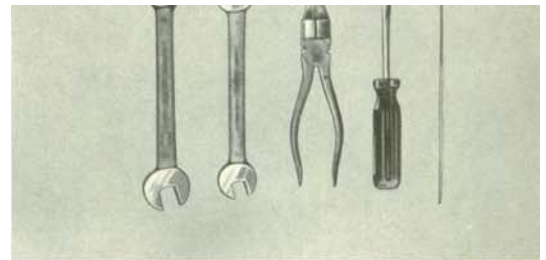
6. Locate adjusting nut in center position between the two brake rod halves and secure by means of the two 14 mm lock nuts. (open ended spanner 14 mm and open ended spanner 17 mm)
